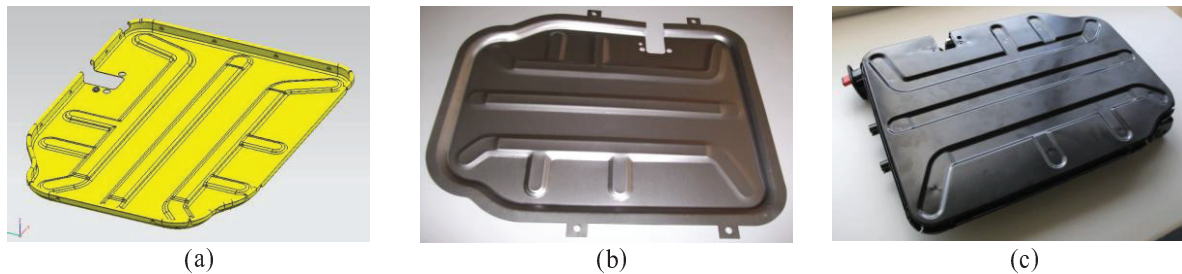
Upper seat-back frame of an automotive (580 x 450 mm, scale 1:1). (a) Drawing, (b) prototype fabricated by SPIF and (c) industrial component fabricated by conventional stamping.
